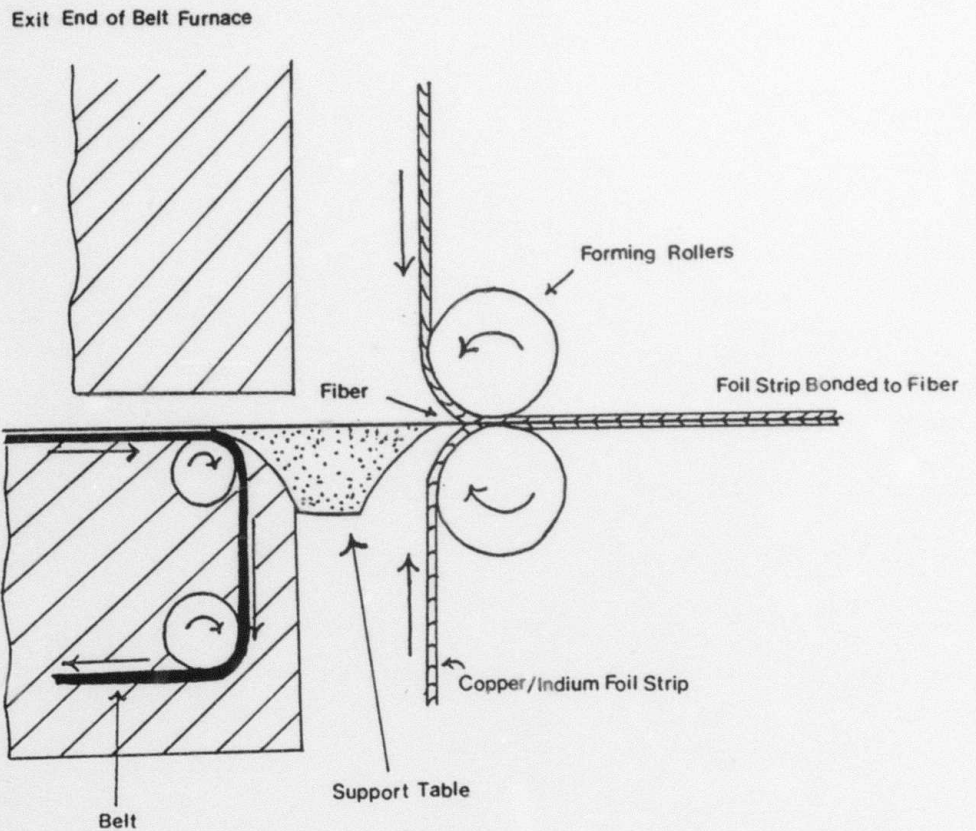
Schematic illustration of mechanical cladding concept. Sintered fiber emerges from belt furnace on left, and is guided between two strips of copper foil clad with indium. Forming rollers bond the ceramic to the indium, and weld together the metal strips.
